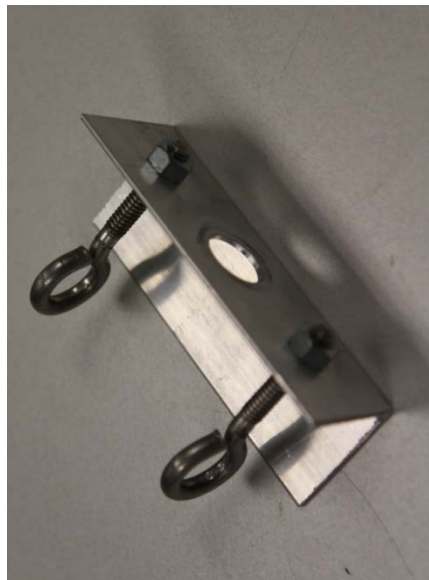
Pneumatic Cylinder Aluminum Mounting Bracket
